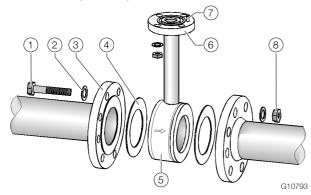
Installing a pipe component (example, wafer type design) (1) Flange screw (2) Washer (3) Flange (4) Flange gasket (5) Pipe component (6) Sensor connection flange (7) Centering pin, outflow side (8) Nut
